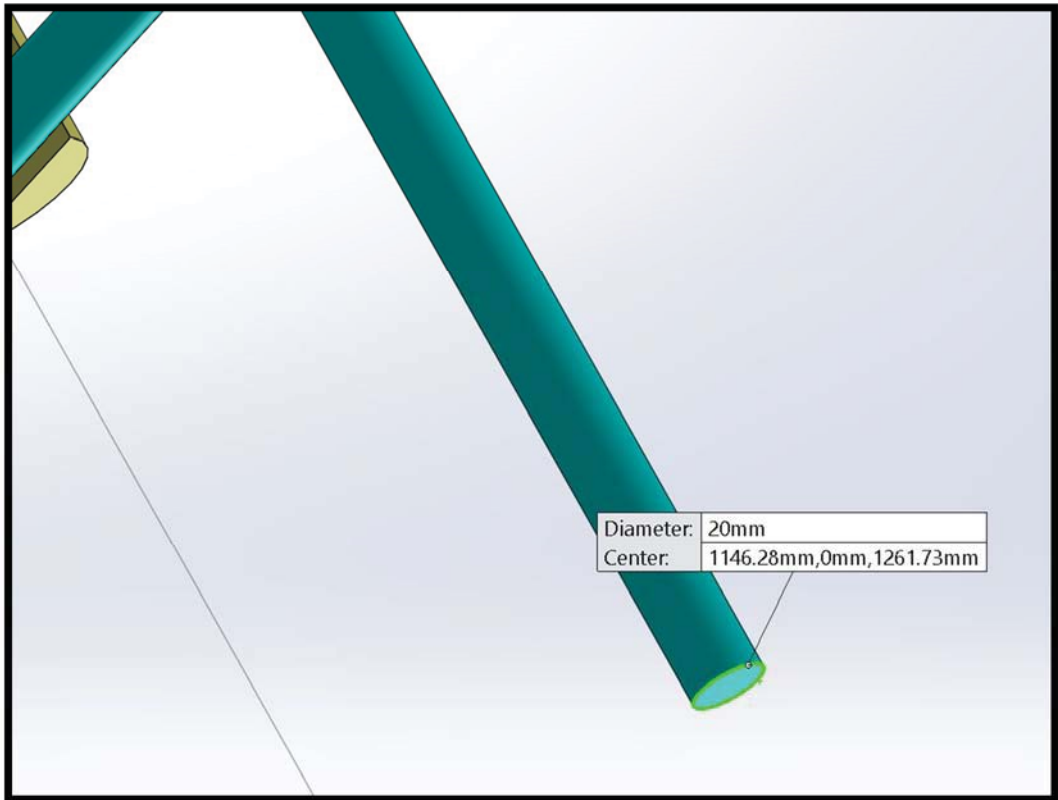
Position of tool tip in the space, using measure tool in Solidworks 2014
